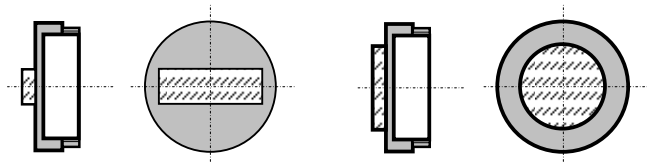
Location of glued rectangular and disk glass specimens on the frontal part of dismantlable support used in abrasive magnetorheological processing.
